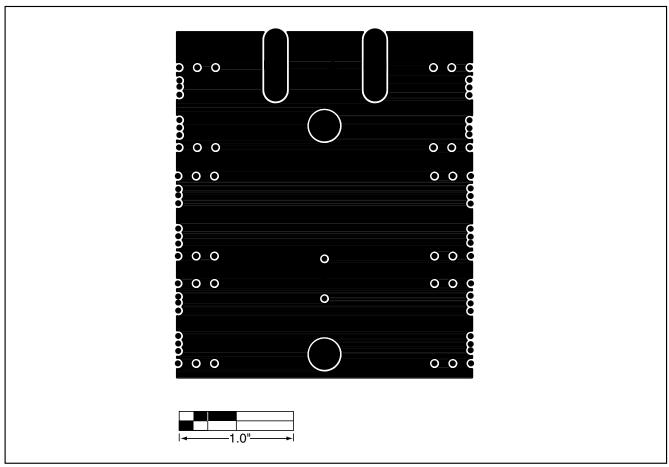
MAX3785 EV Kit PC Board Layout—Power Plane
